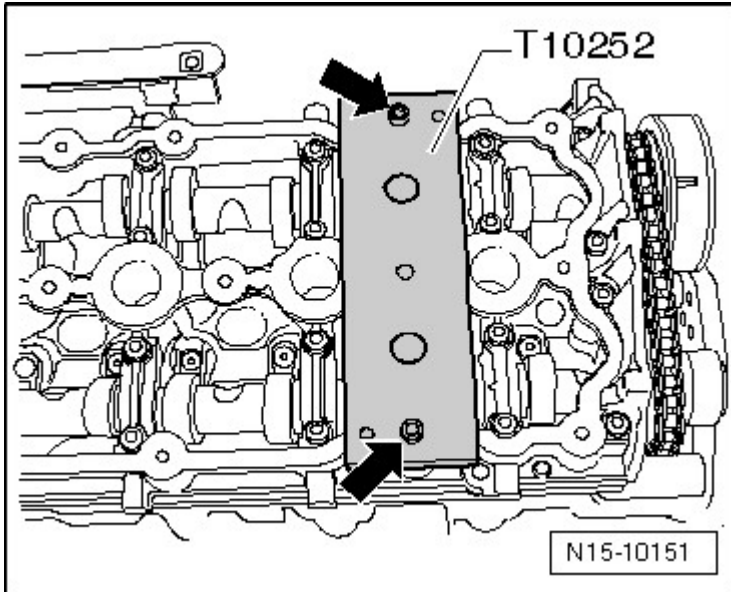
Identifying Camshafts Secured Using Camshaft Locator T10252
